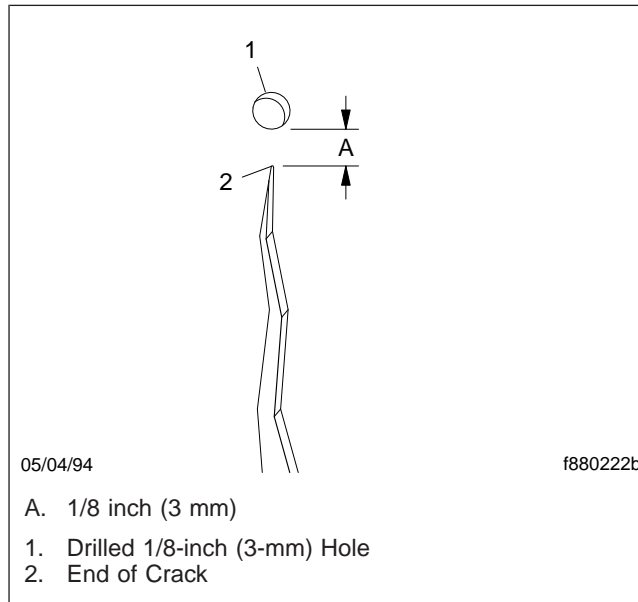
, Drilling a Hole to Prevent the Crack From Lengthening
